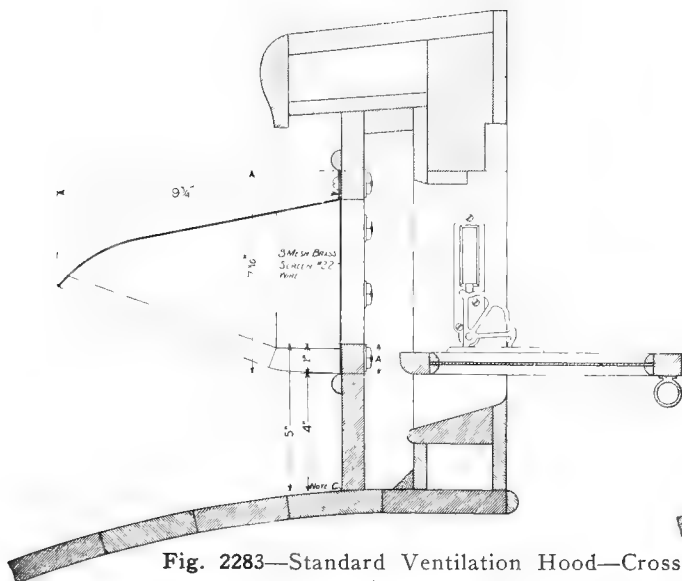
Standard Ventilation Hood—Cross Section, Wood Car.
